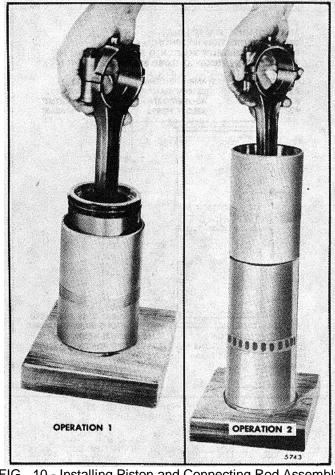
Installing Piston and Connecting Rod Assembly in Ring Compressor and Cylinder Liner
